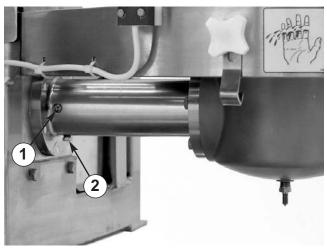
Lubrication Points. (1) Grease Fitting, (2) Pipe Plug, horizontal bearing housing
